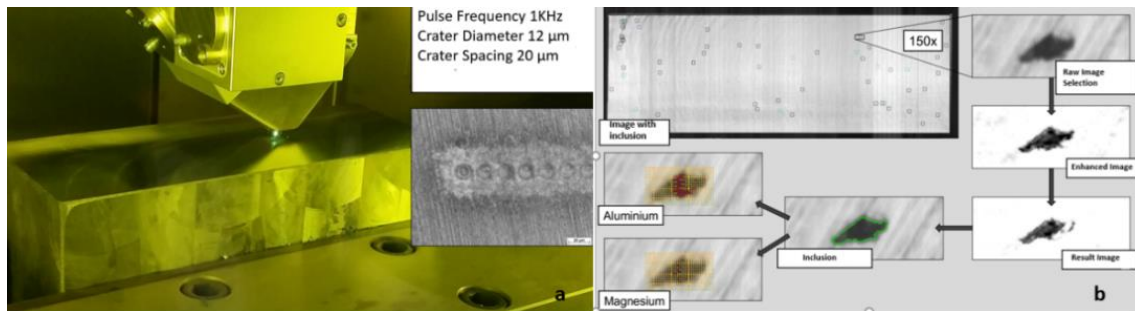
9. (a) SILENOS imaging machine (b) SILENOS image processing steps [28]
